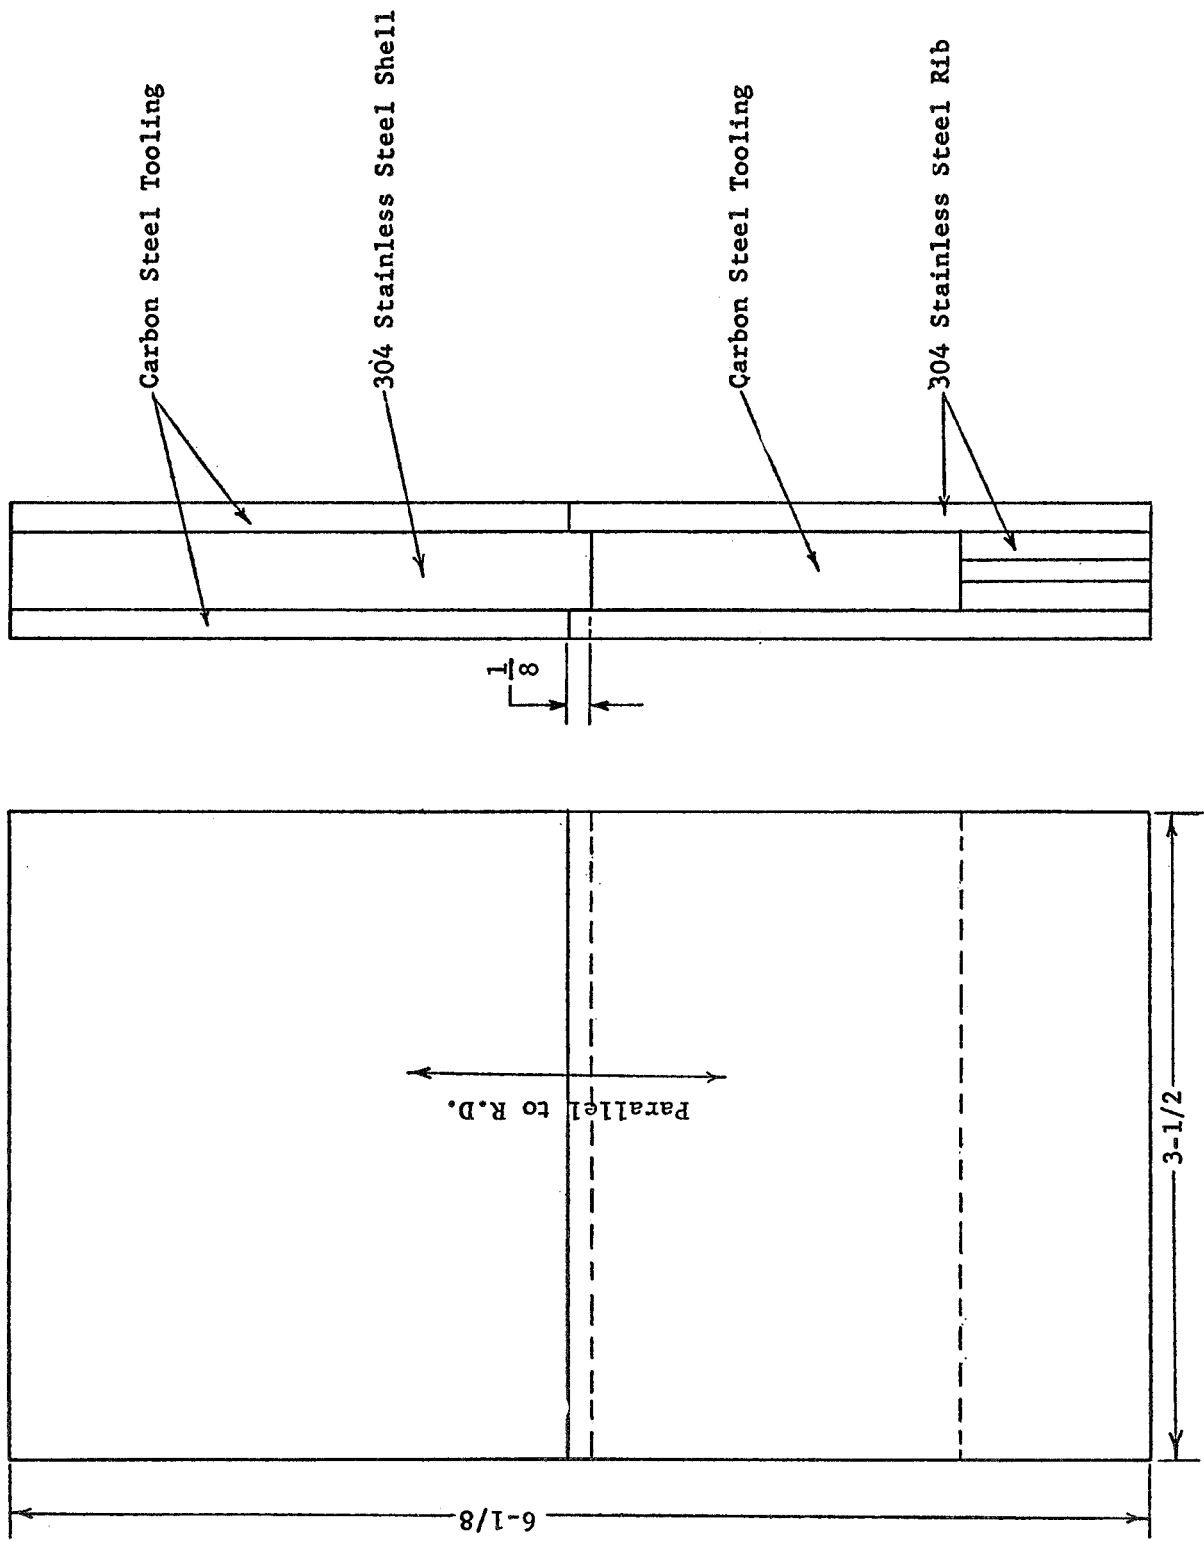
SHEAR-SPECIMEN DESIGN FOR 304 STAINLESS STEEL RIB-SHELL BOND (SPECIMEN 4)
